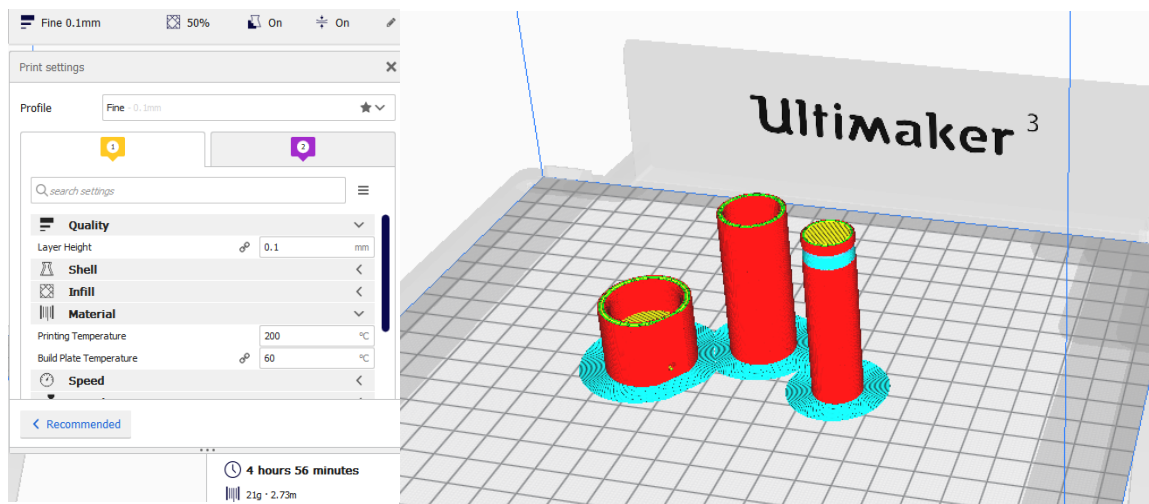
Cylinder, Piston and End Cap for 3D printing in the Ultimaker 3 printer, using the Cura slicer. The main settings are also visible on the left.
